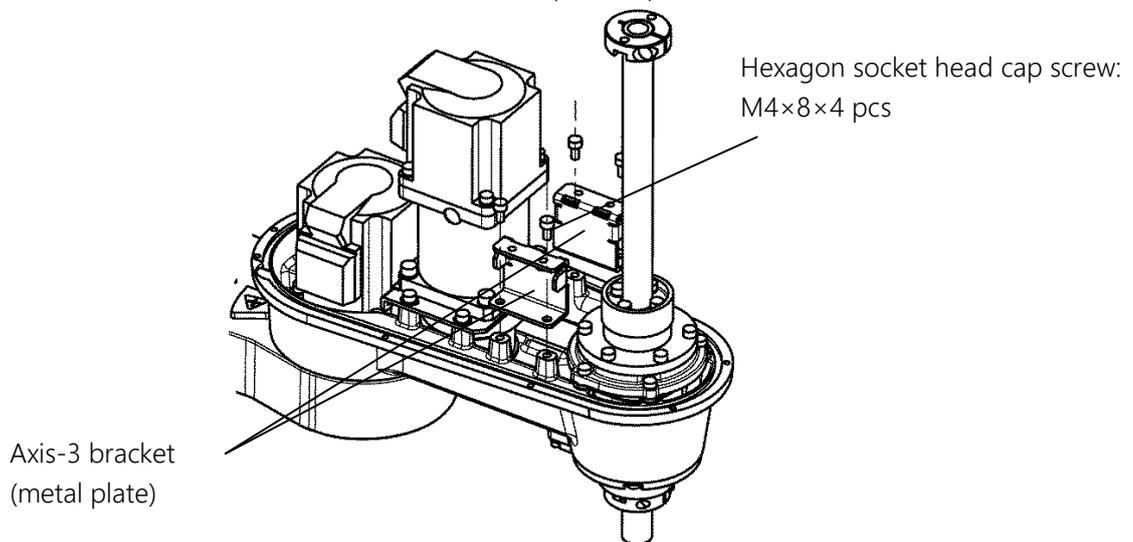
Removing the axis-3 bracket (metal plate)
